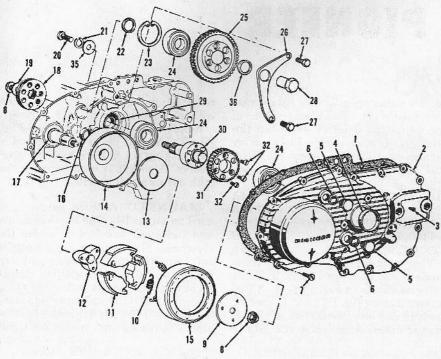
View of gear reduction transmission. Bearings (24) are tight fit on shaft (30) and In bores of cover and housing. Clutch cover (15) is not used on later models.
